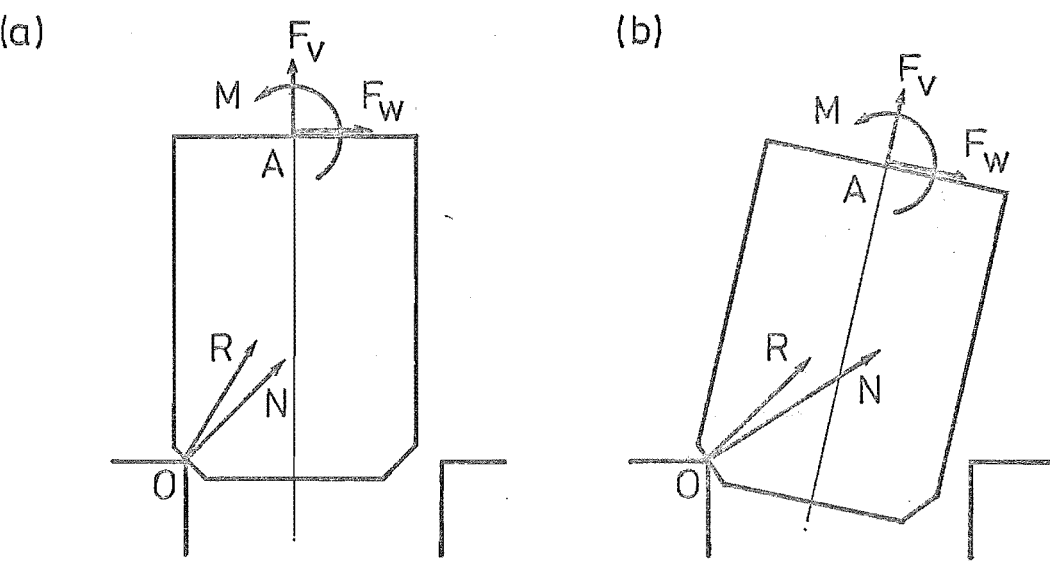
PEG CHAMFER FACE/HOLE EDGE CONTACT
